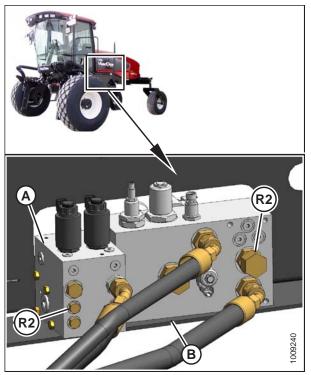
Valve Blocks without Reverser Valve in Factory Configuration
